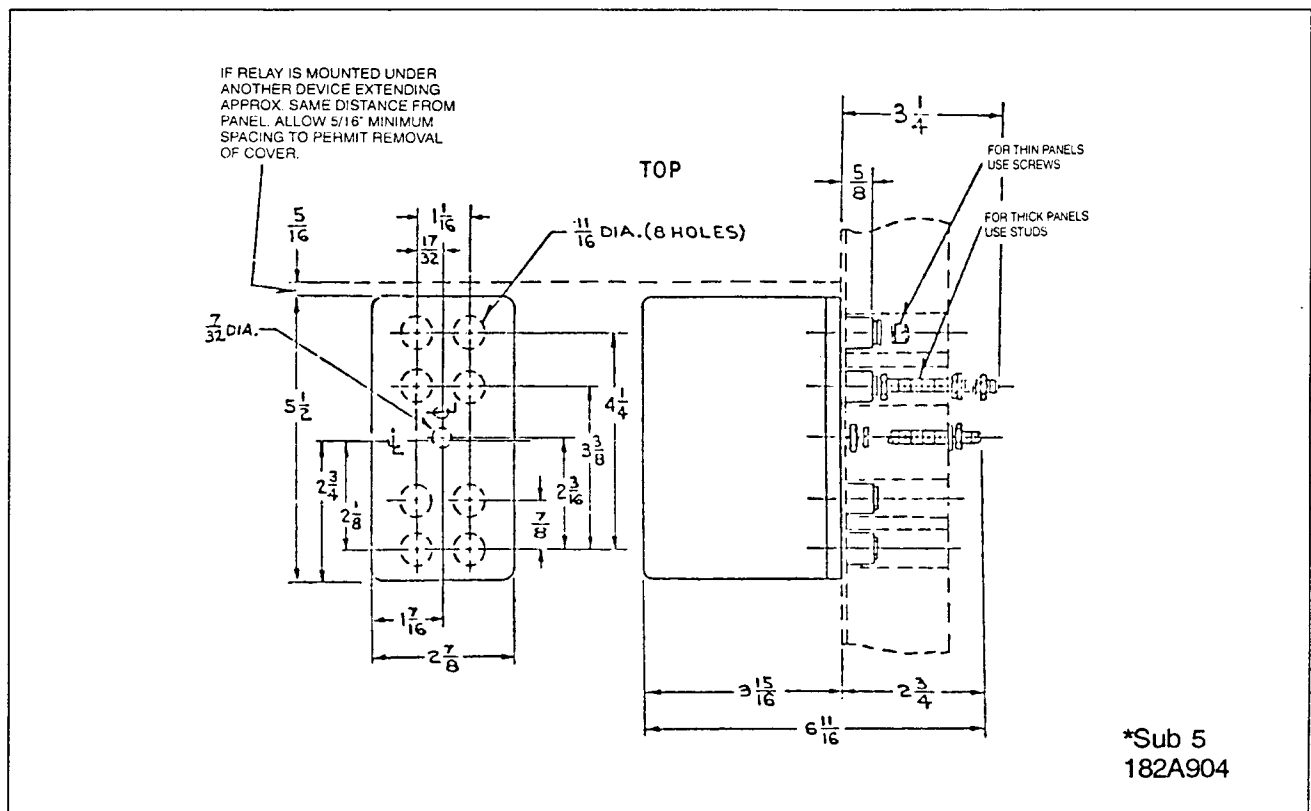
Outline and Drilling Plan for the Type AR Relay in the Rear Connected Molded Case.
